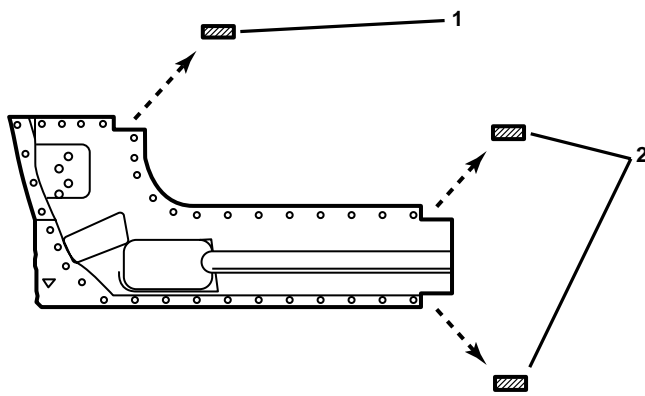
2000 DeVille Inner Front Pillar Service Part
